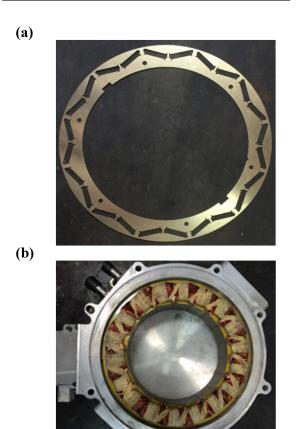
(a) Rotor of prototype motor. (b) Stator of prototype motor.
